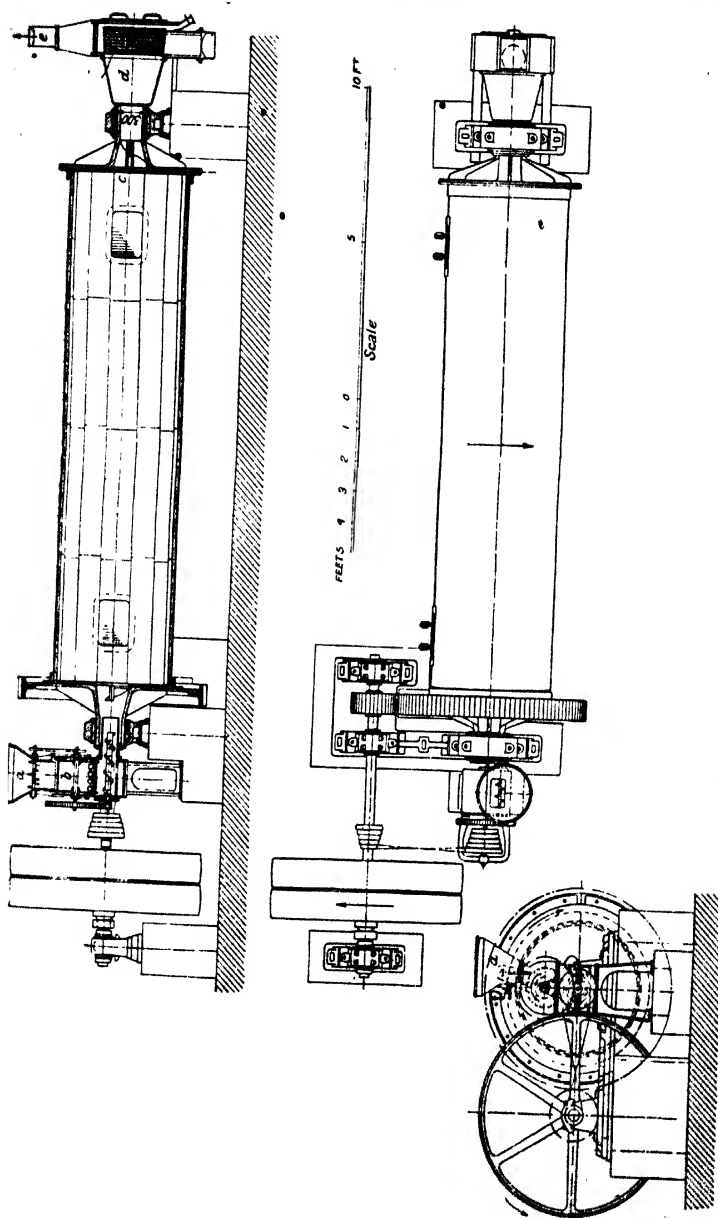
Tube mill. Sectional elevation, plan and end elevation.
